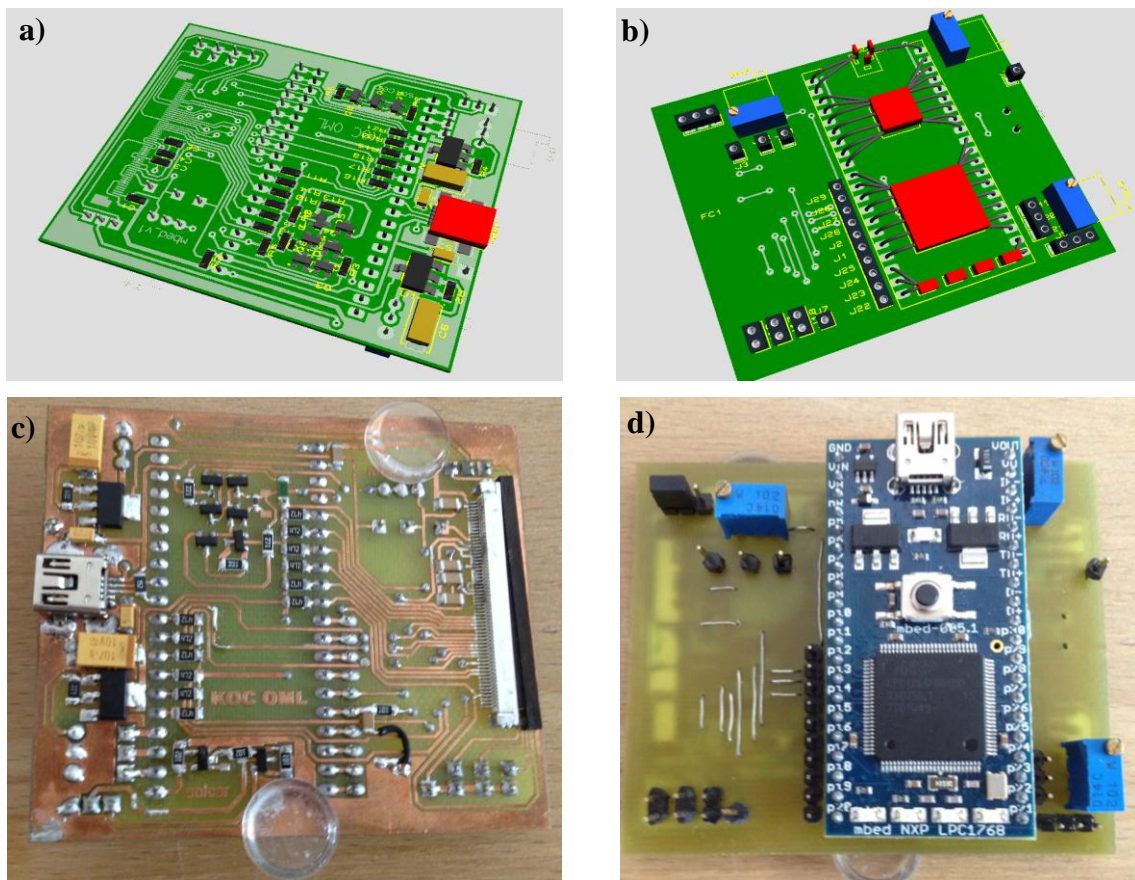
(a) Top view of the layout. (b) Bottom view of the layout. (c) Top view of the PCB. (d) Bottom view of the PCB.
